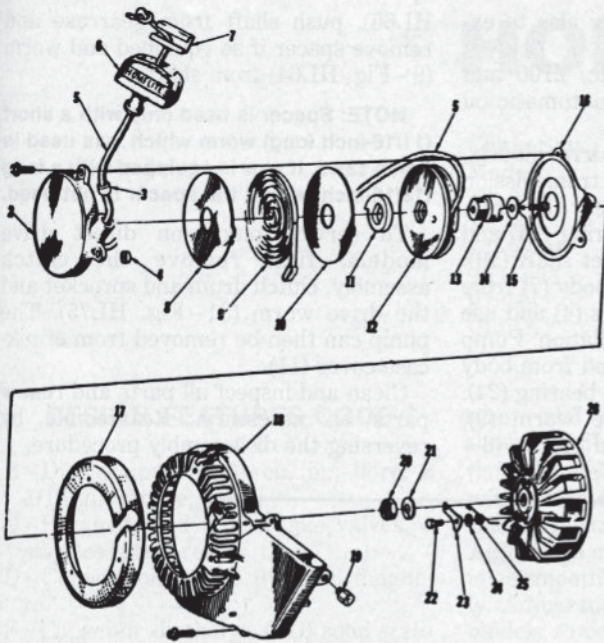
Exploded view of pawl type starter used on models outlined in text.
